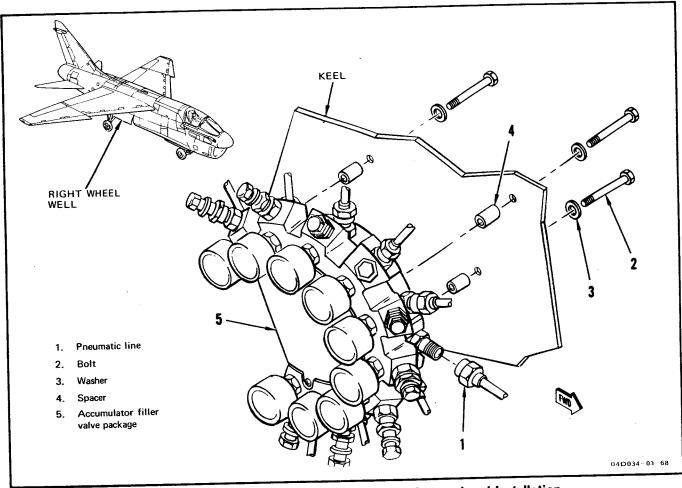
Accumulator Filler Valve Package Removal and Installation
